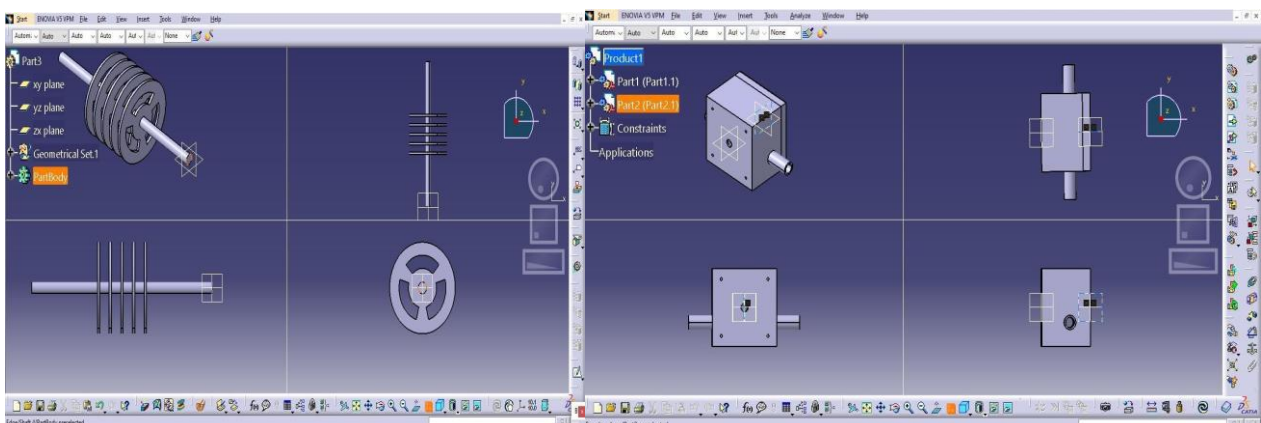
The 3D drawing of the a) rotor (left) and b) Tesla turbine (right)
